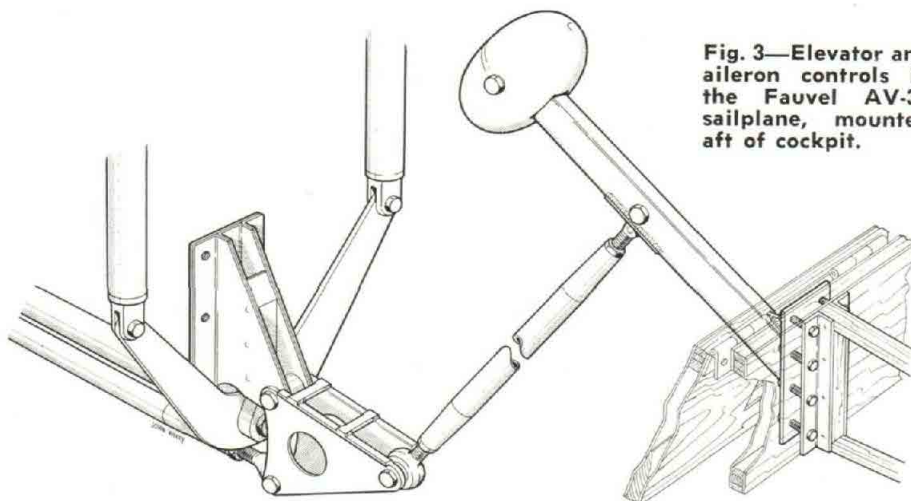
Elevator and aileron controls in the Fauvel AV-36 sailplane, mounted aft of cockpit.
